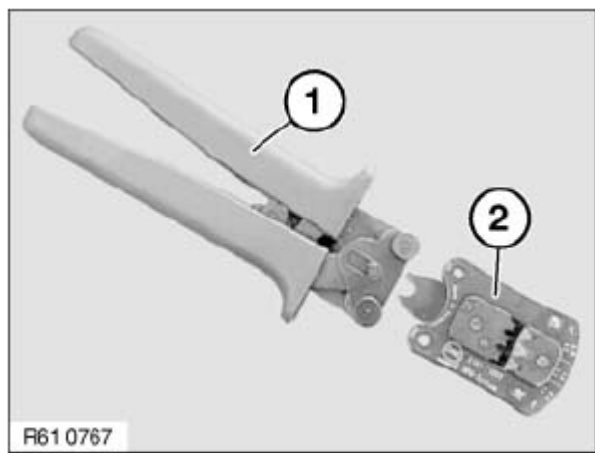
Identifying Pliers (61 4 321) And Crimping Head (61 4 325)
